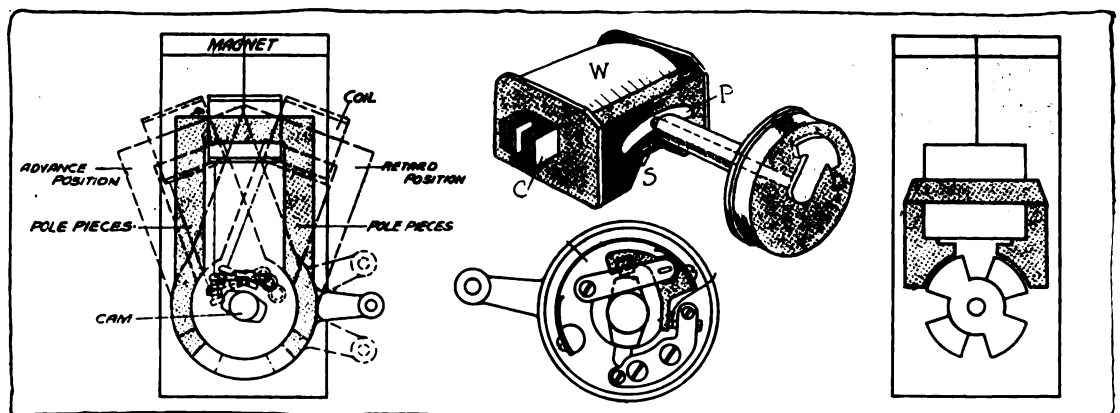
Left, showing how the laminated field with its windings rocks inside the magnets simultaneously with the circuit breaker. Center, the windings and distributor block of the four-cylinder model, and below, the distributor with stationary contact points. Right, the laminated field on the eight and twelve-cylinder magnetos in relation to the rotating pole extensions
